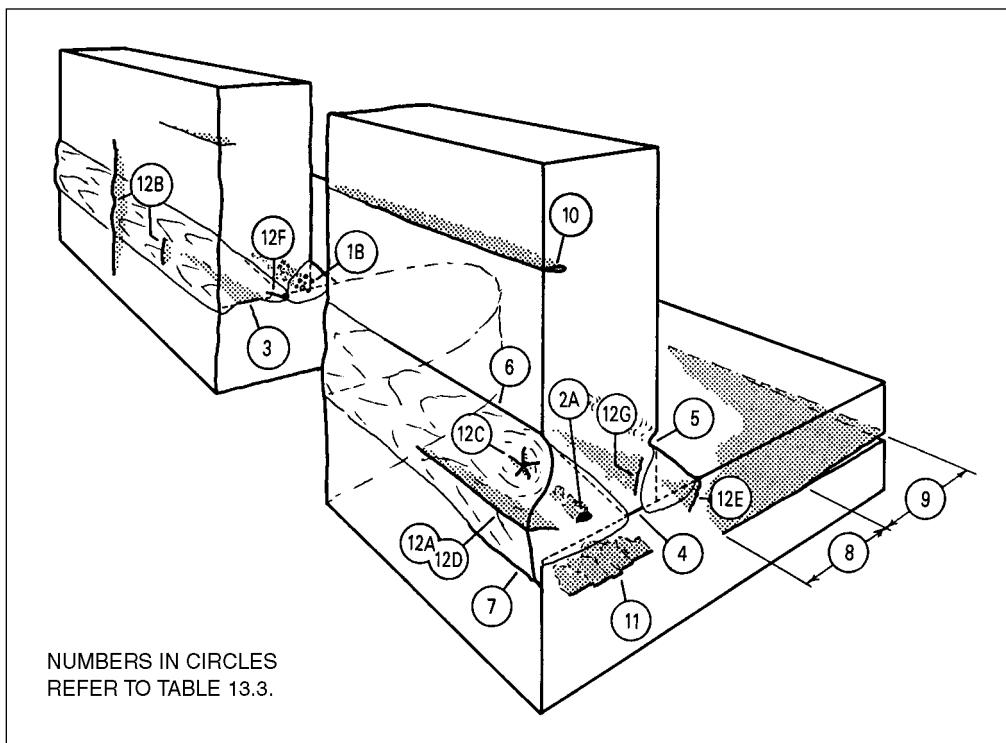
Discontinuities in a Double-V-Groove Weld in a Butt Joint
